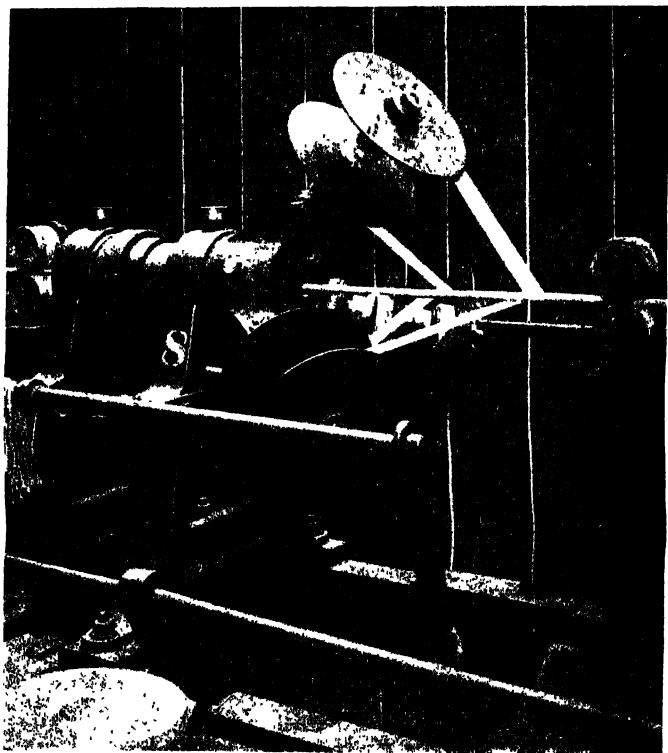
THREE-ARMED PAPER-LAPPING HEAD
